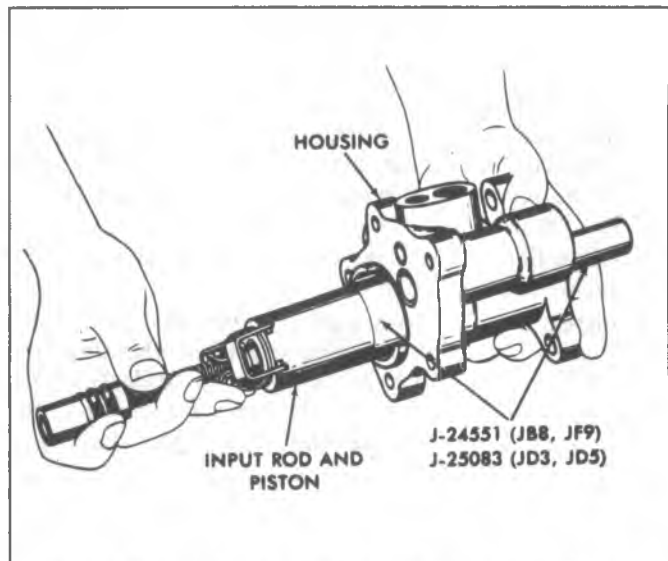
B13--Installing Input Rod and Piston Assembly Into Booster (Typical)
